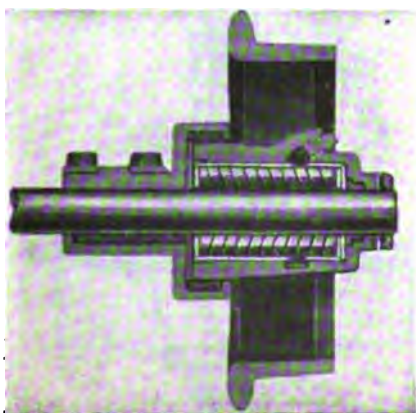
SEC. 1066.—Wheel equipped with Hyatt roller bearing.
